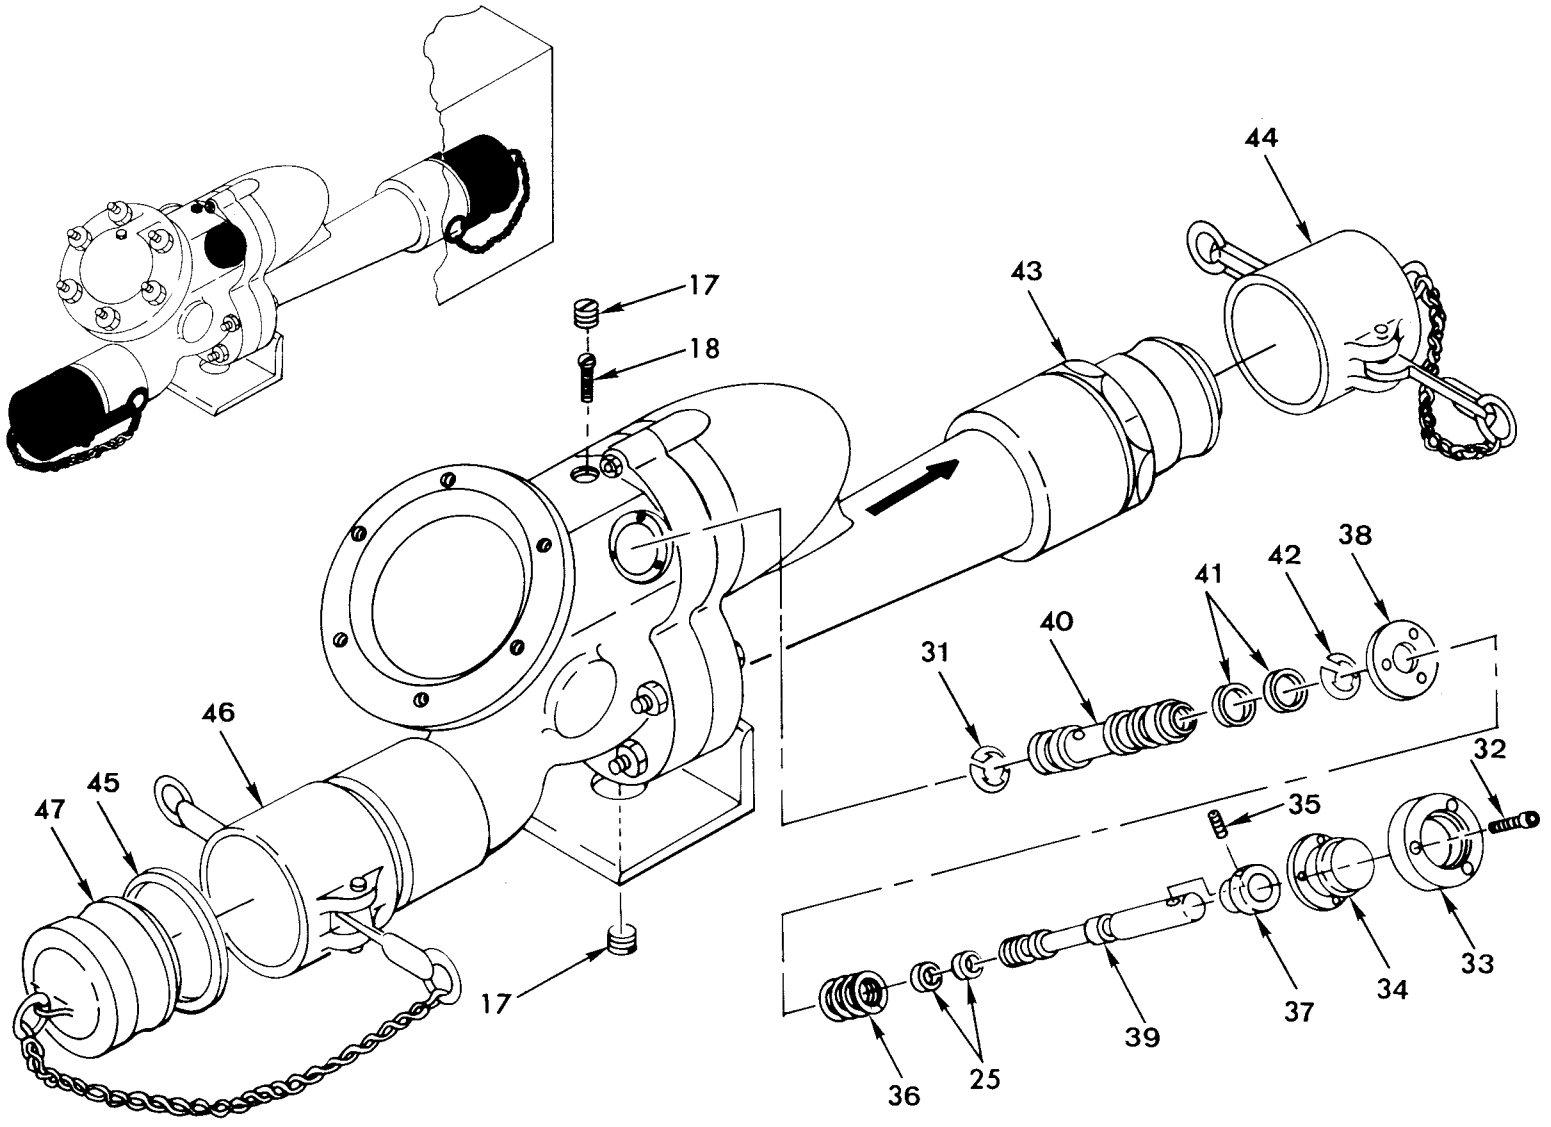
Pressure Control Assembly (Sheet 3 of 3)
